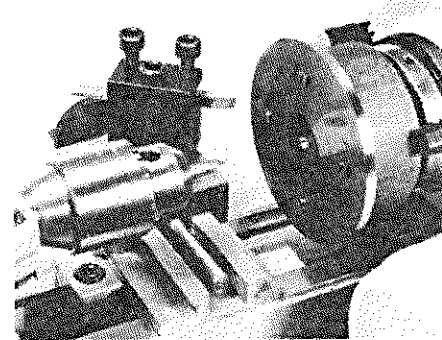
Using the lathe tailstock centre to locate the wheel blank while the wood screws are inserted
